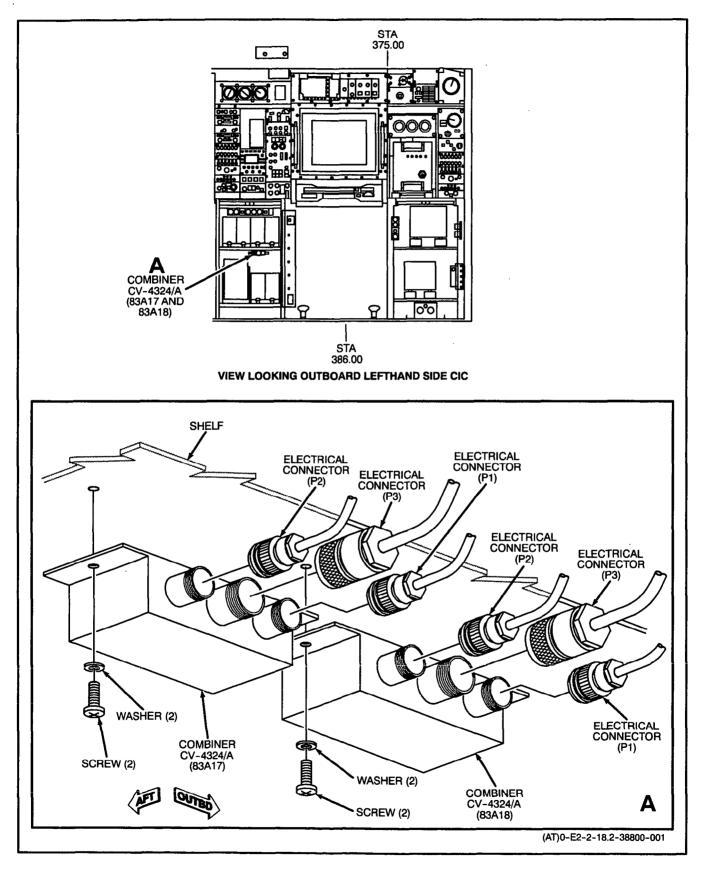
Removal and Installation of Combiner CV-4324/A (83A17 and 83A18)
